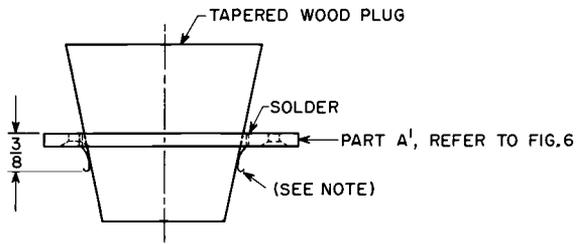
Recommended procedure for soldering finger stock to A<sup>1</sup> of plate-line assembly.
